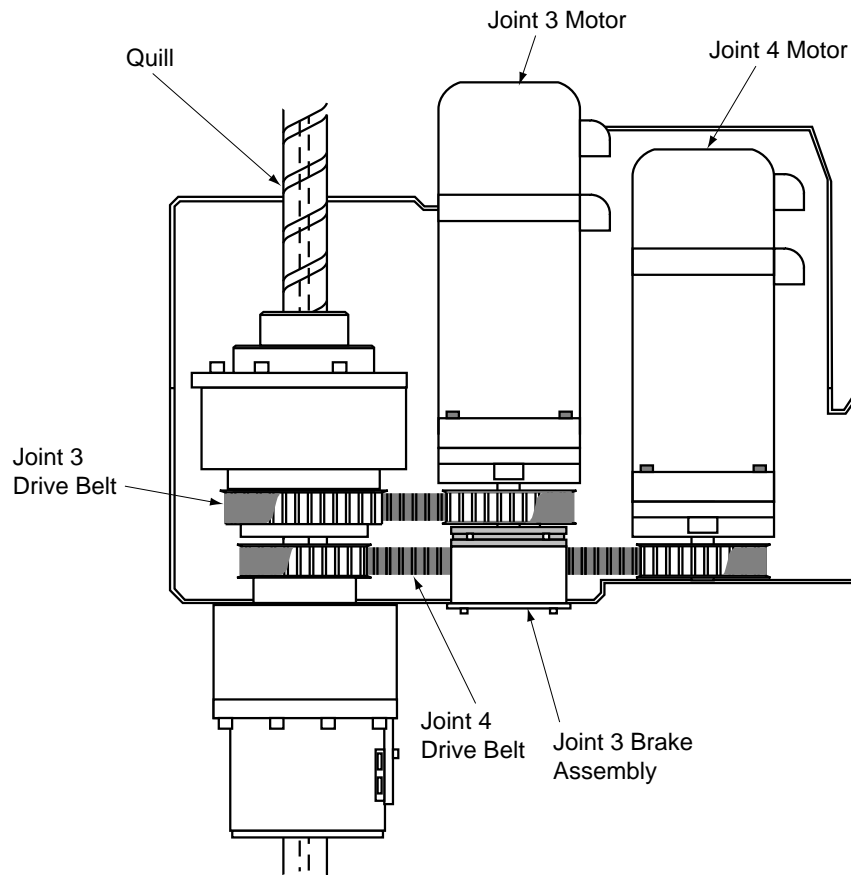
Location of Joint 3 and Joint 4 Drive Belts
